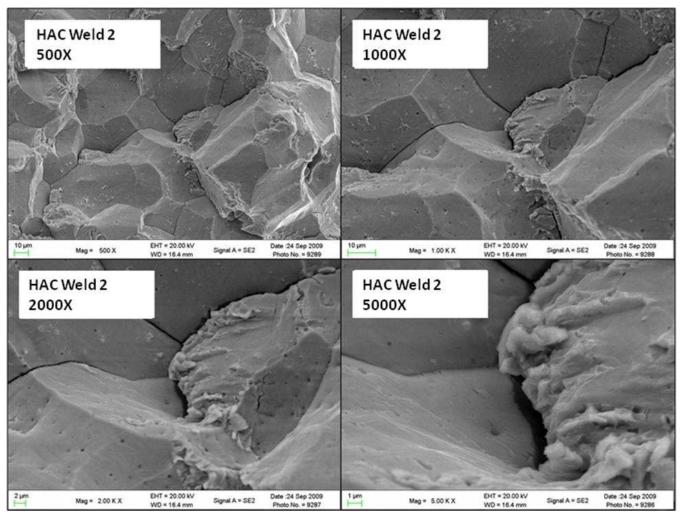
SEM of the HAC surfaces in the GTAW weld deposit of the 22V SAW weld 2 deposit. Note the intergranular macro-morphology with the transgranular crack propagation revealing a quasi cleavage morphology.
